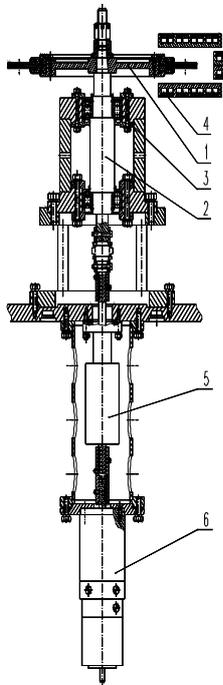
Sketch of prototype. 1 – rotating disk with converter; 2 – shaft; 3 – bearings; 4 – cooling panels; 5 – rotation feed-through; 6 – DC motor
